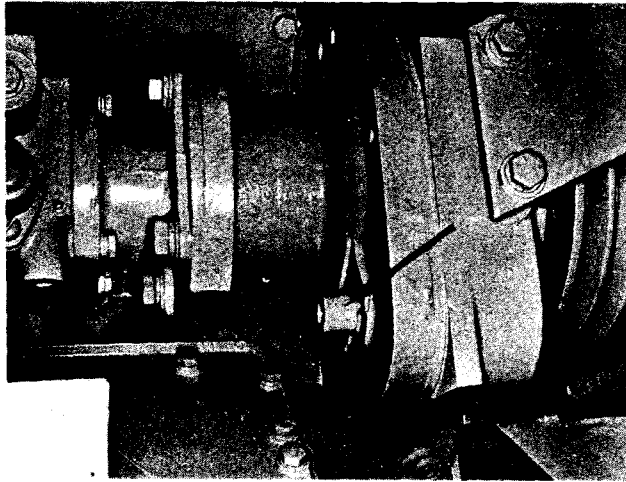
(V51486) Engine barring arrangement (V-903)
